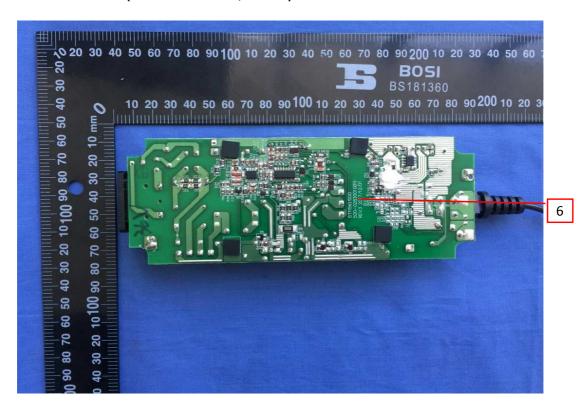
PCB Bottom Side (12.0-36.0V model, Class I)
